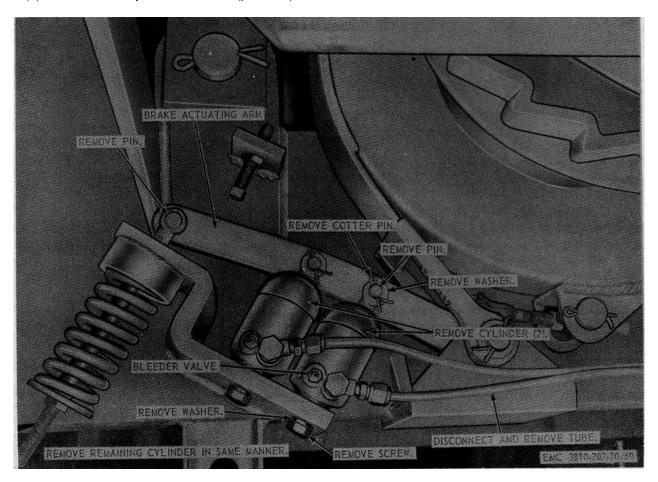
Boom hoist brake hydraulic cylinder, removal and installation.
